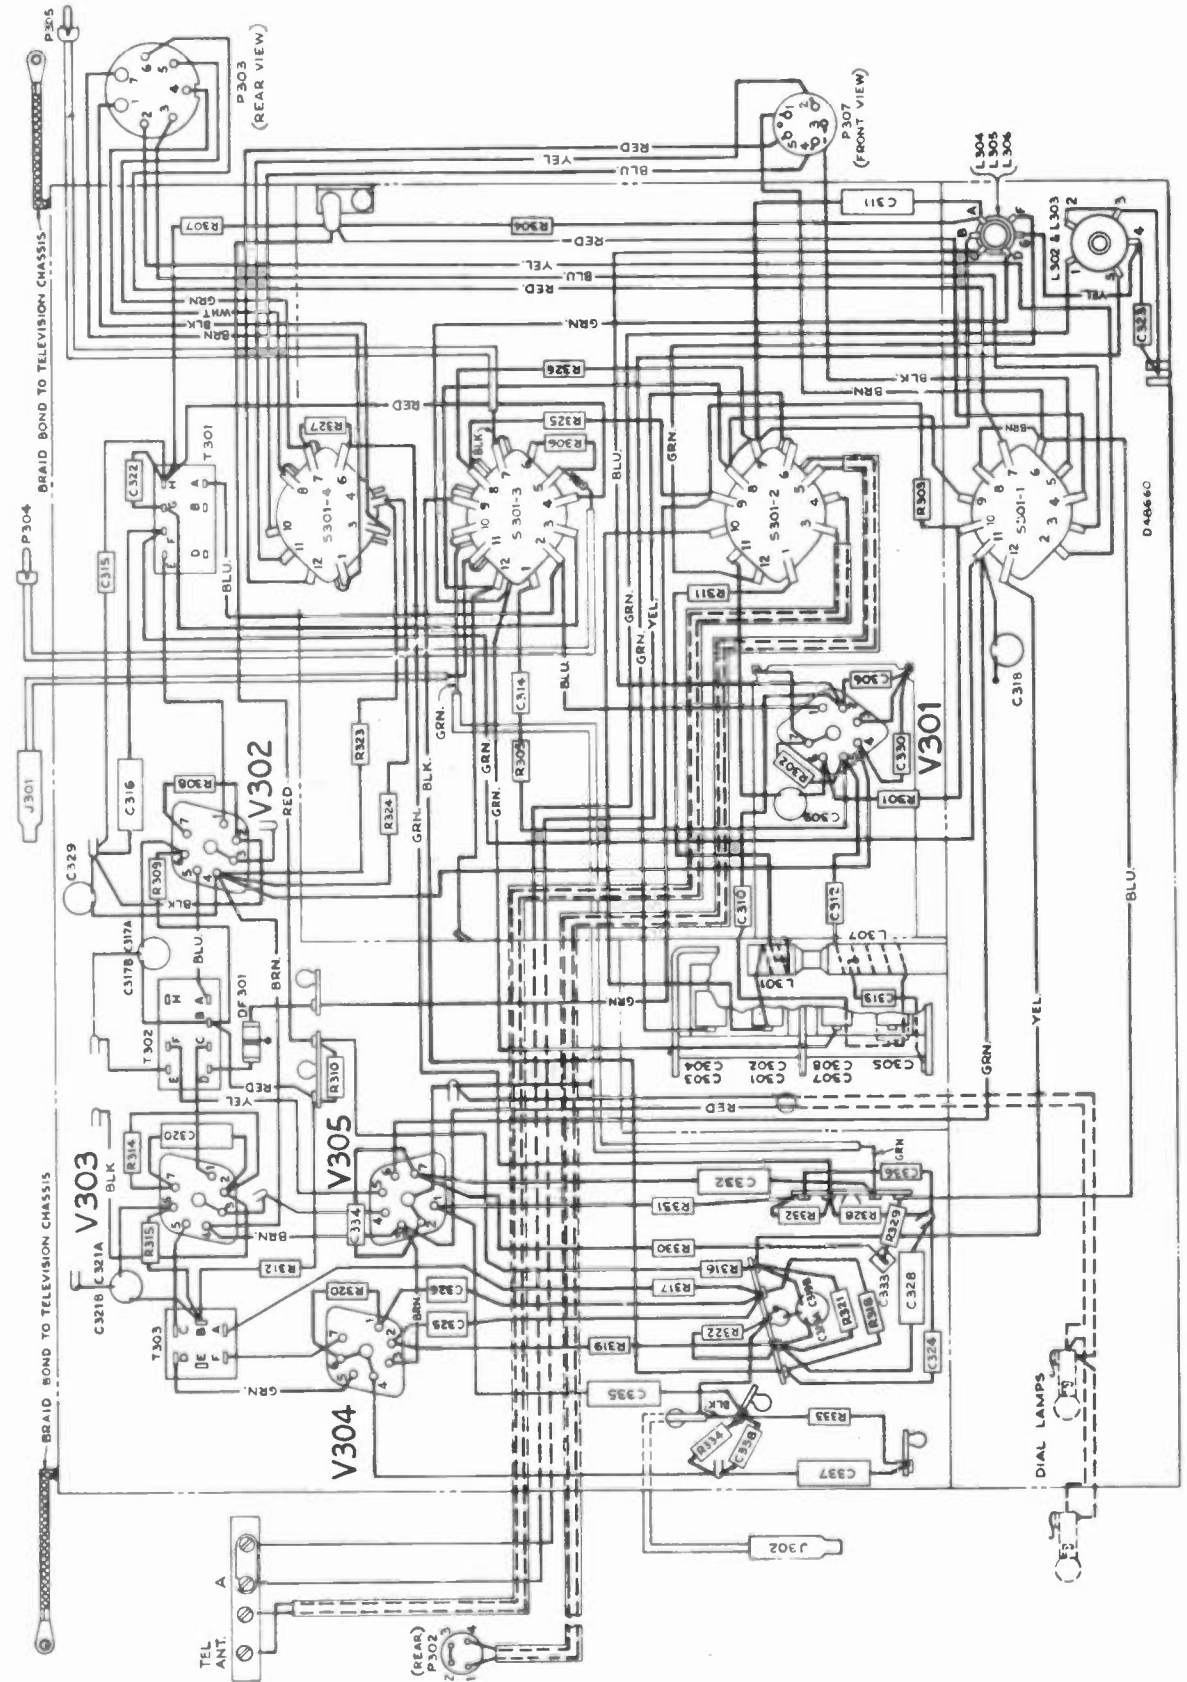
Radio Chassis Wiring Diagram (RK135C)
